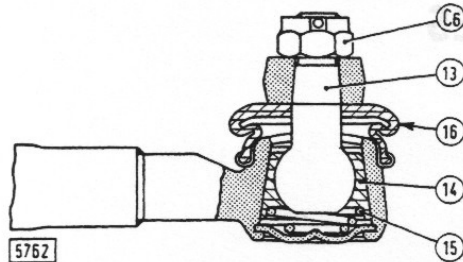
Self-lubricating ball joint. (C6) Nut securing steering lever to ball pivot. (13) Ball pivot. (14) Tapered nylon bushing. (15) Seat (14) retaining spring. (16) Dust cap.
